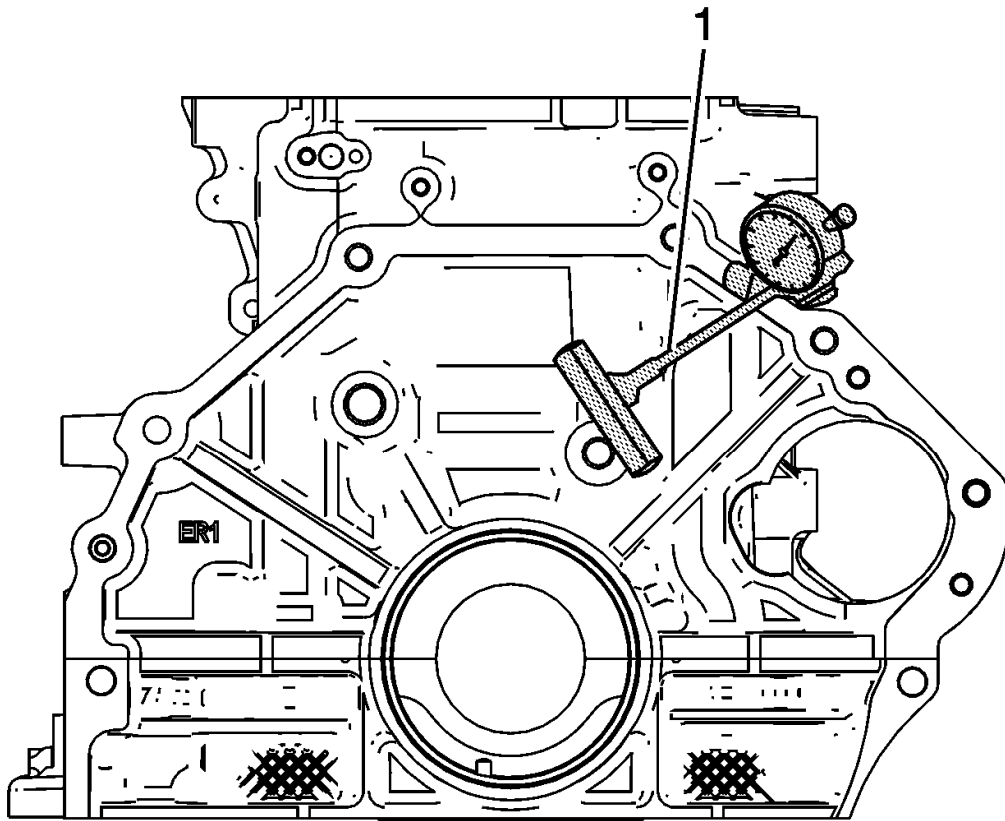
Measuring Crankshaft Flange Runout Using Dial Indicator
